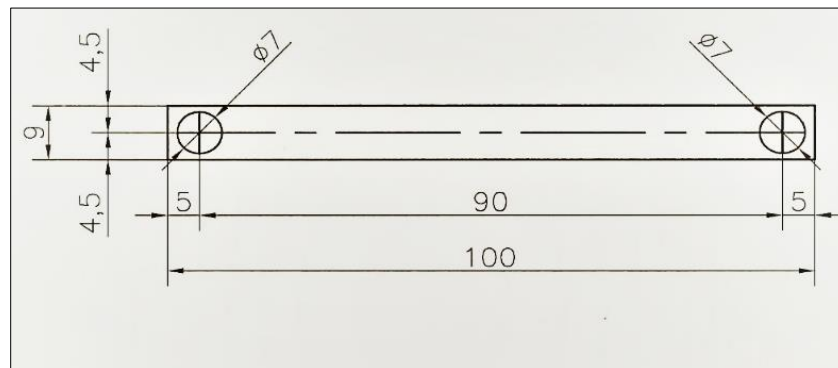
The dimension of the samples used in stress corrosion cracking testing experiments
